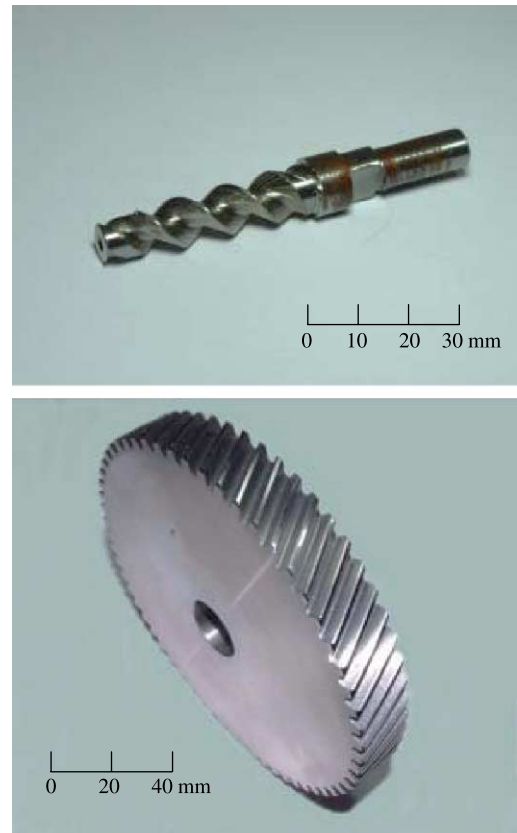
Pinion and gear with profile shifting and modified tooth surface.
